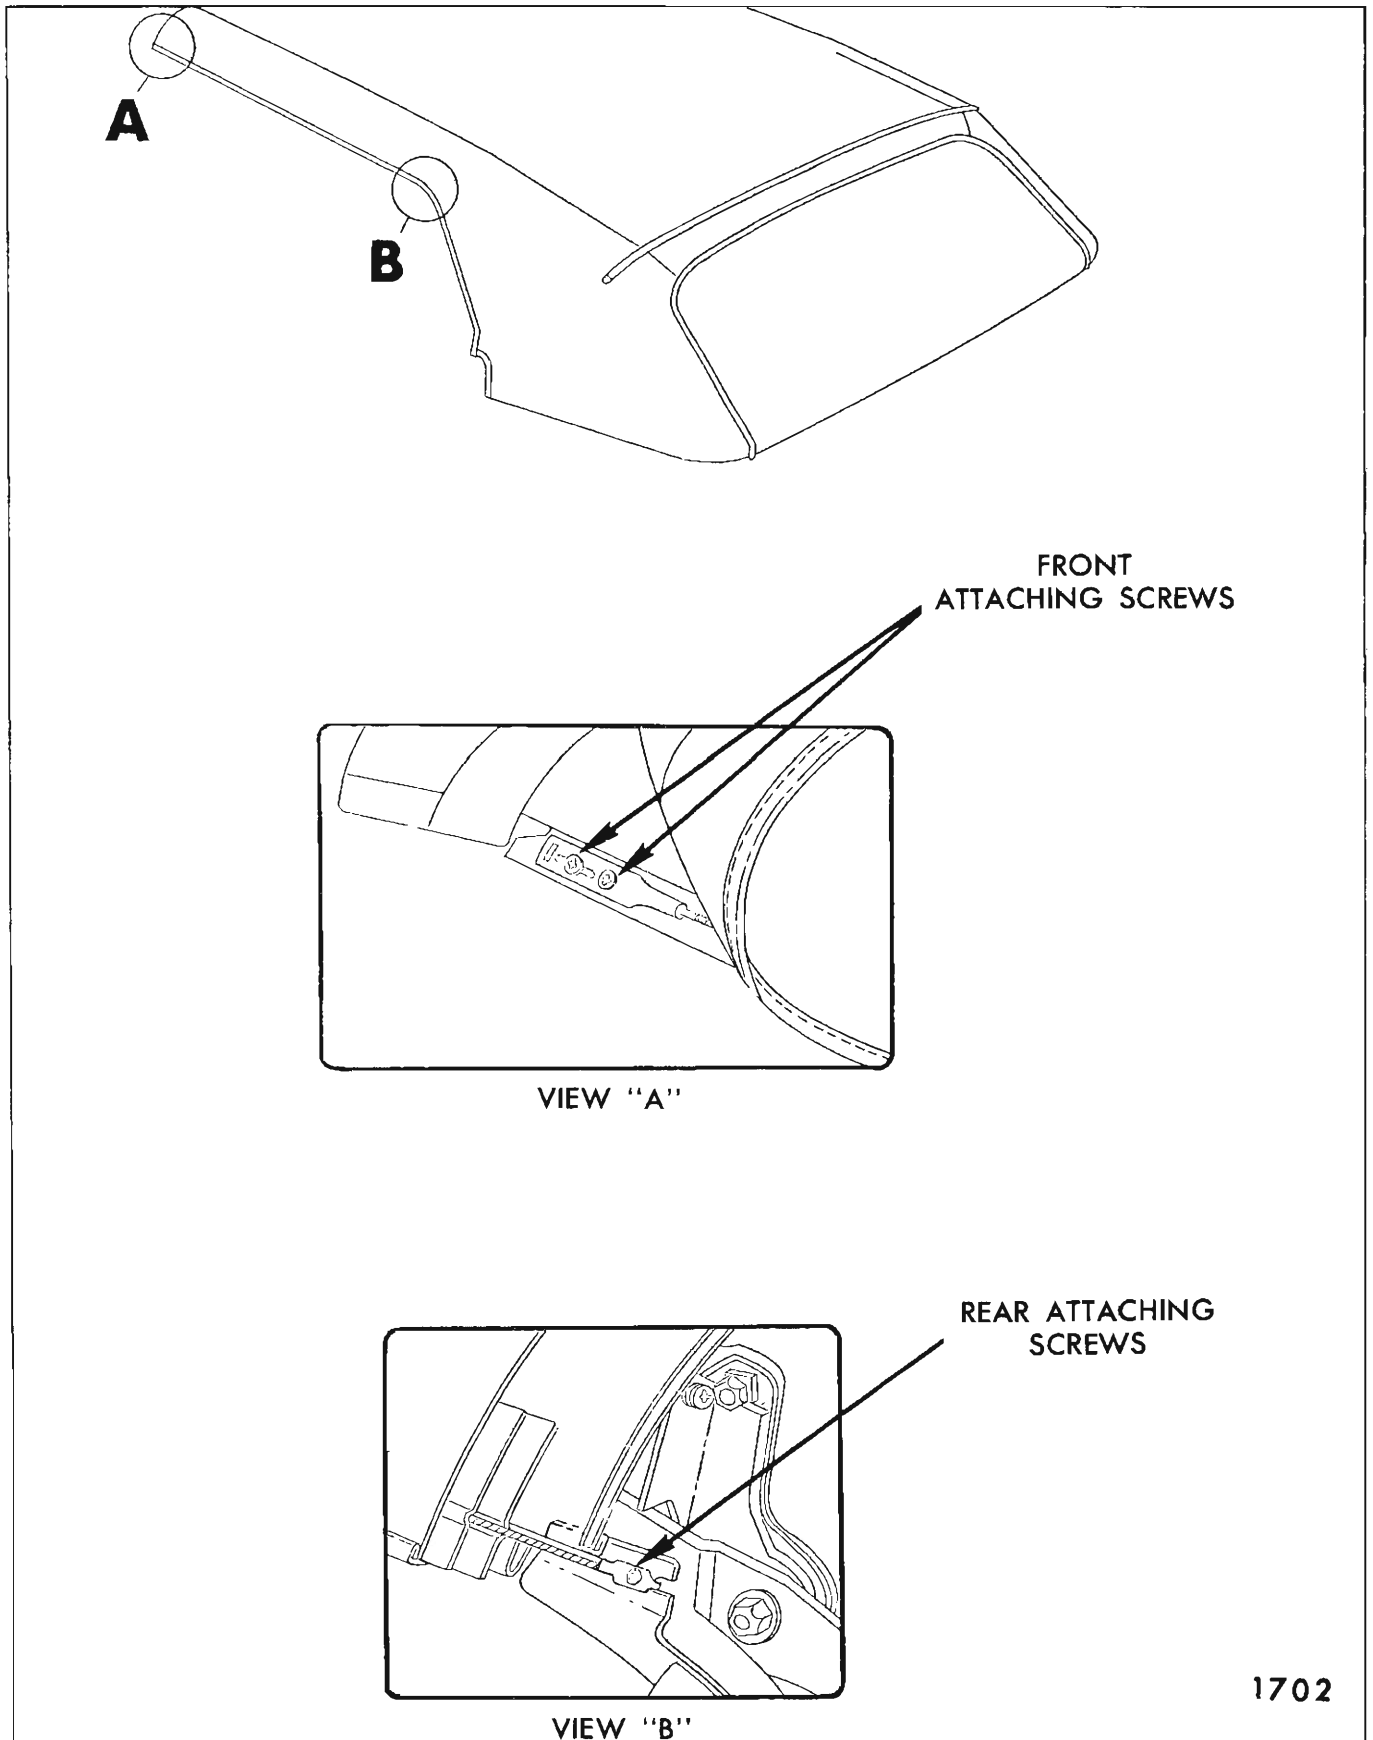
I-27 — Hold-Down Cable Attaching Screws
